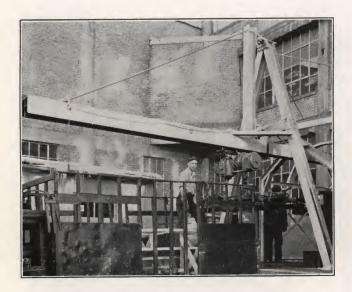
B—Interlocking Jib with shielded electrification at receiving dock for moving steel on elevator to basement storage.
